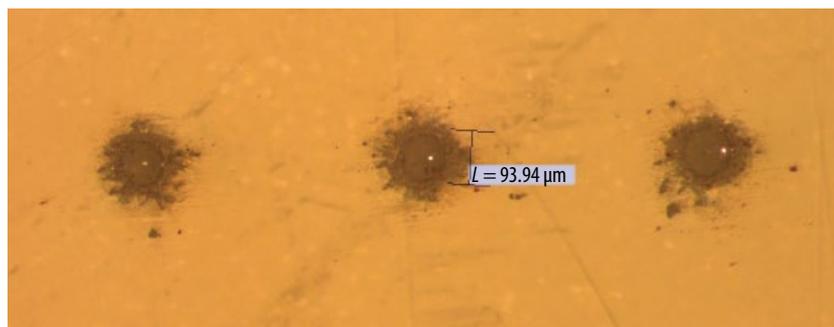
Holes with a diameter of about 90 μm are successfully drilled in a 50 μm thick glass substrate using the CO laser.
